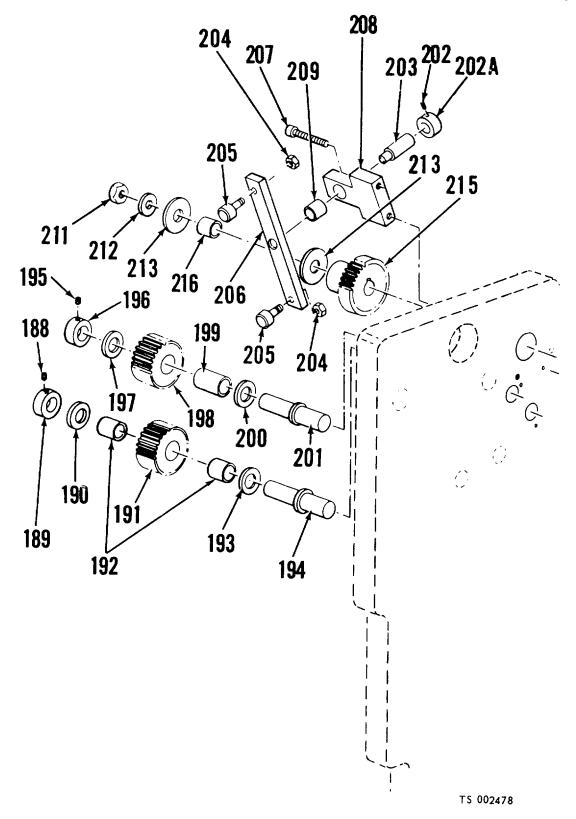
Ink motion assembly (Sheet 6 of 8).
